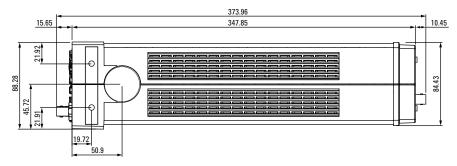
Dimensions (side view, without handle and bumper, in millimeters, nominal)
